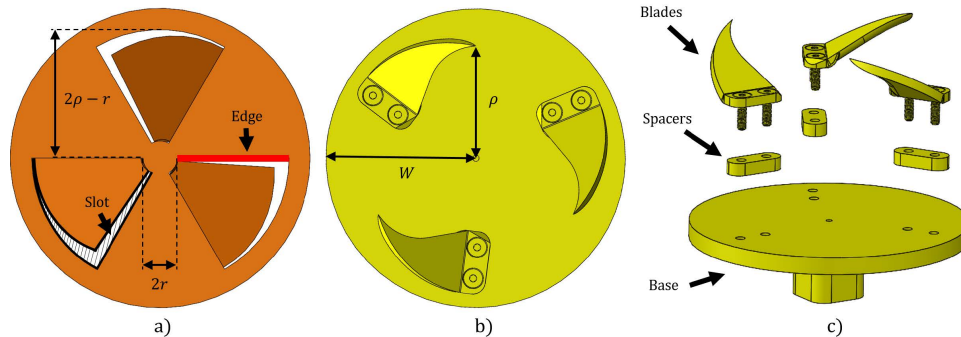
a) Latching pattern cut from cardboard with red lines denoting engagement edges where the blades contact when fully engaged, b) Latch assembled configuration, and c) Components of the latch.
